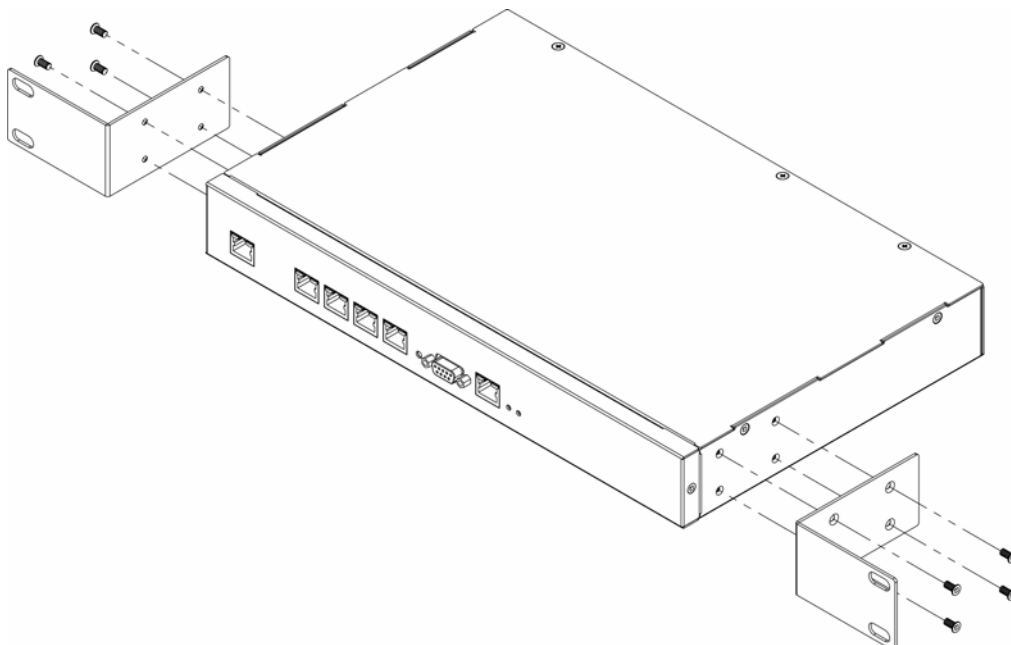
Standard 19" Rack-Mount Installation of IPM-4SE Unit requires 1RU space
